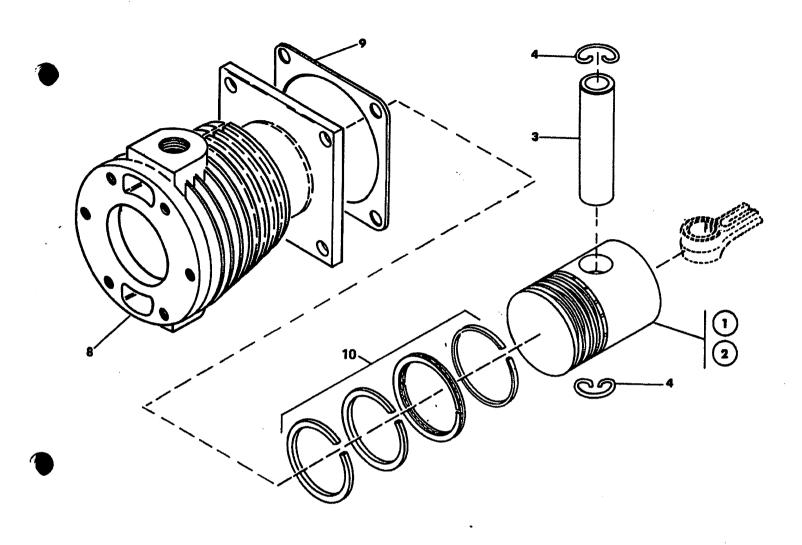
4 INCH DIAMETER PISTON AND CYLINDER ASSEMBLY
